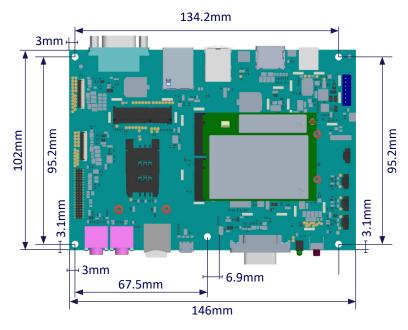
Dimensions of the VIA VAB-935 carrier board (top view)
